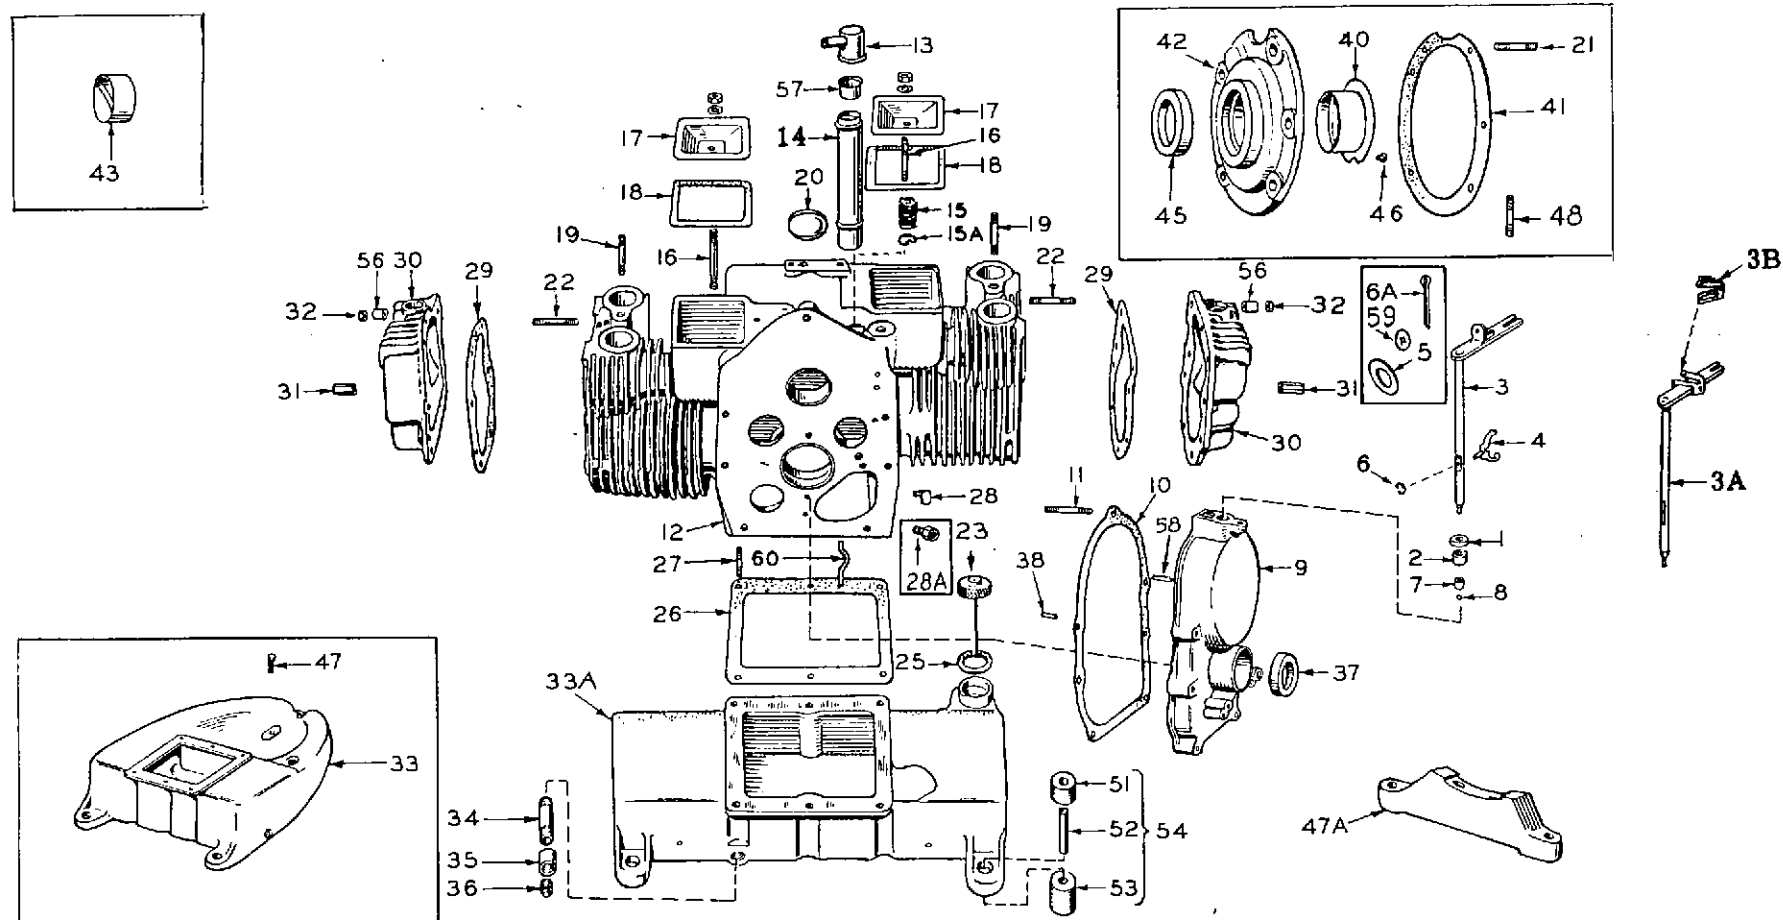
FIG. A - CYLINDER BLOCK, OIL BASE & GEAR COVER GROUP.
